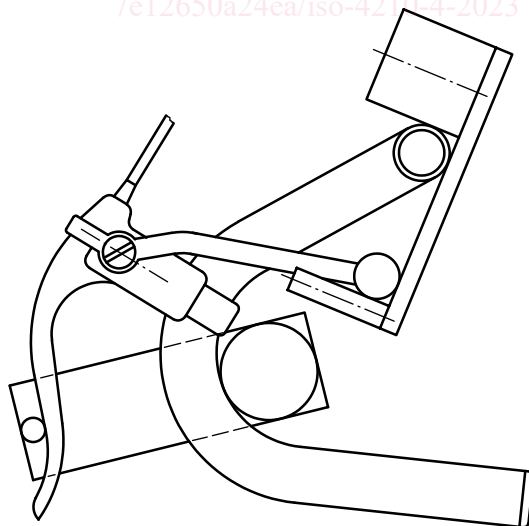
Method of fitting the gauge to the brake lever and handlebar for type C
